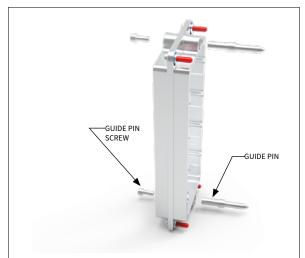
/D4 ITA with guide pins and guide pin screws flipped, removed and ready to insert and tighten.
